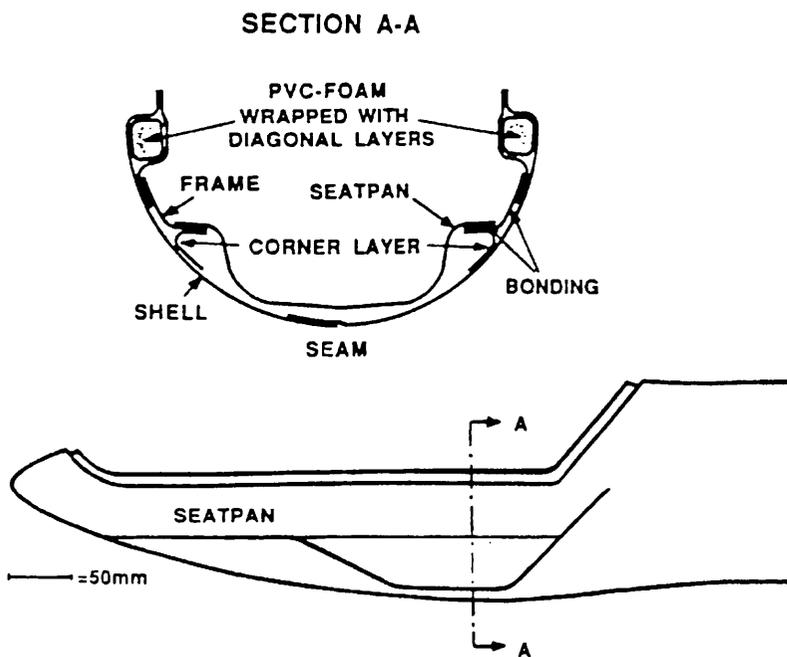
GEOMETRY OF IMPROVED FUSELAGE
